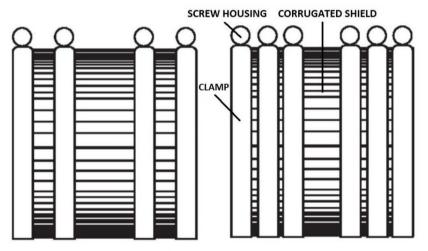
SHIELD AND CLAMP ASSEMBLY (STANDARD)
